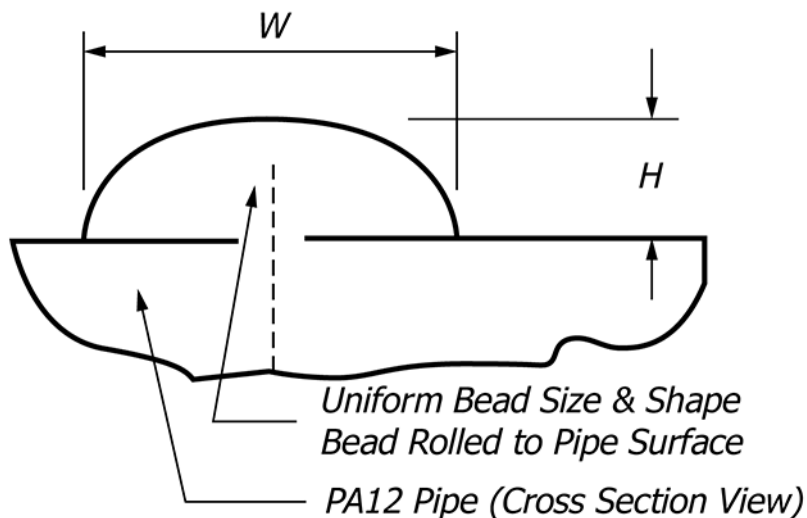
Outside Diameter Butt Fusion Bead Dimensions
